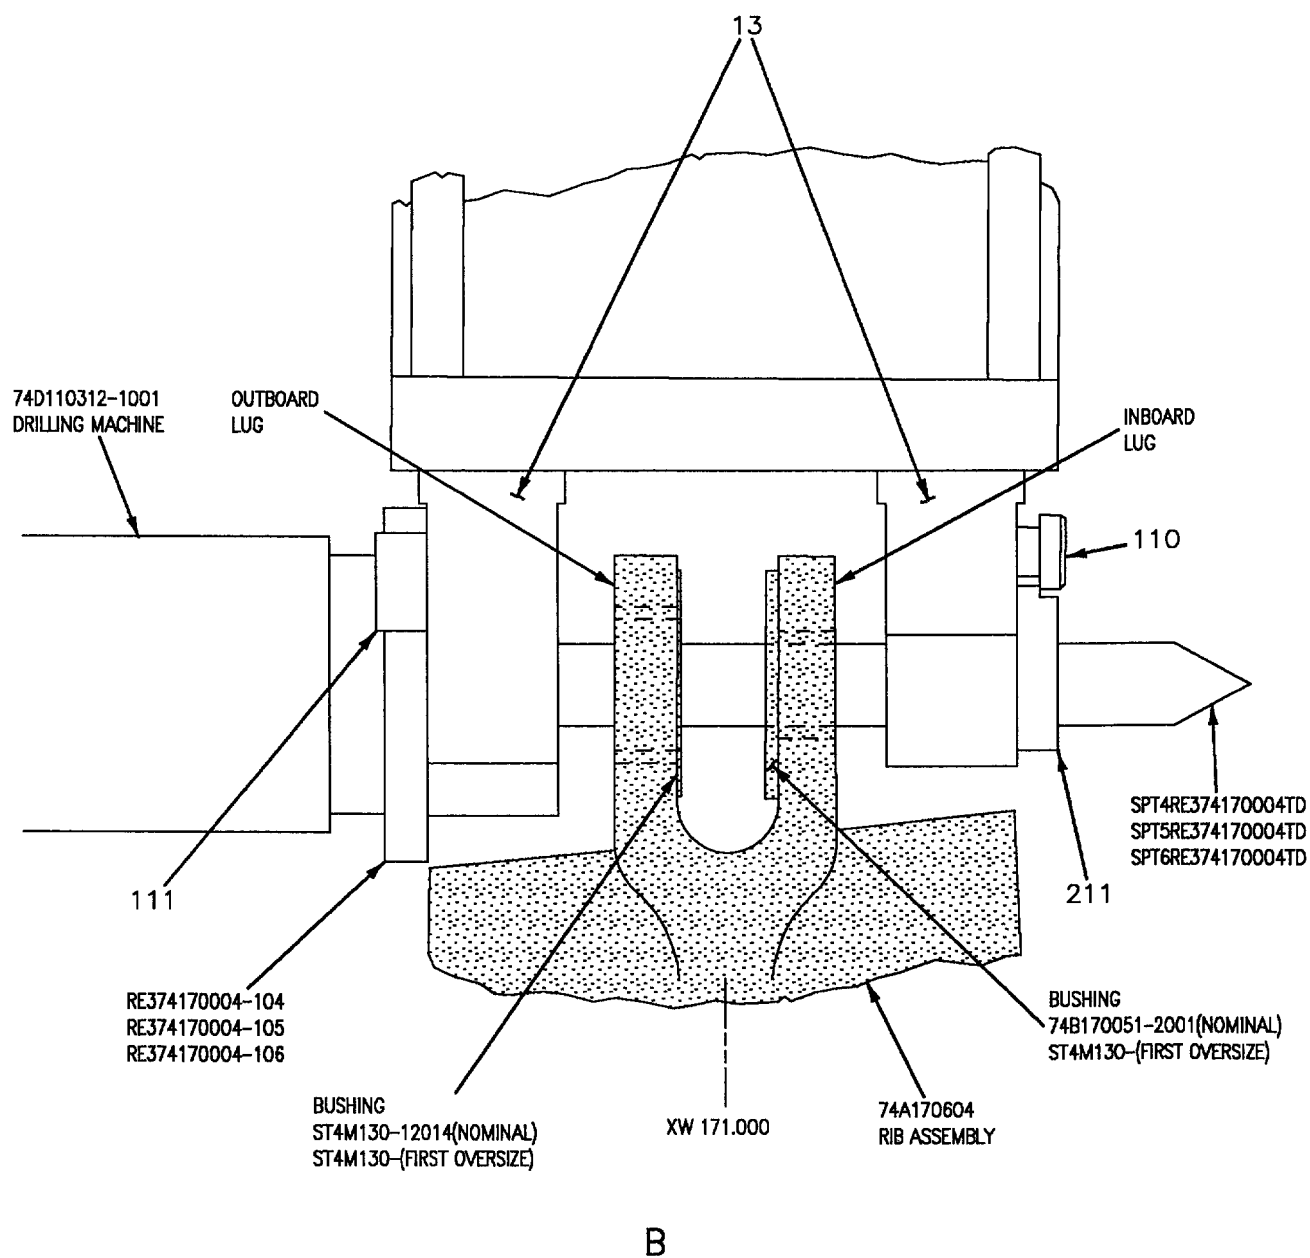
Bushing Replacement at 74A170604 Rib Assembly (Sheet 3)
